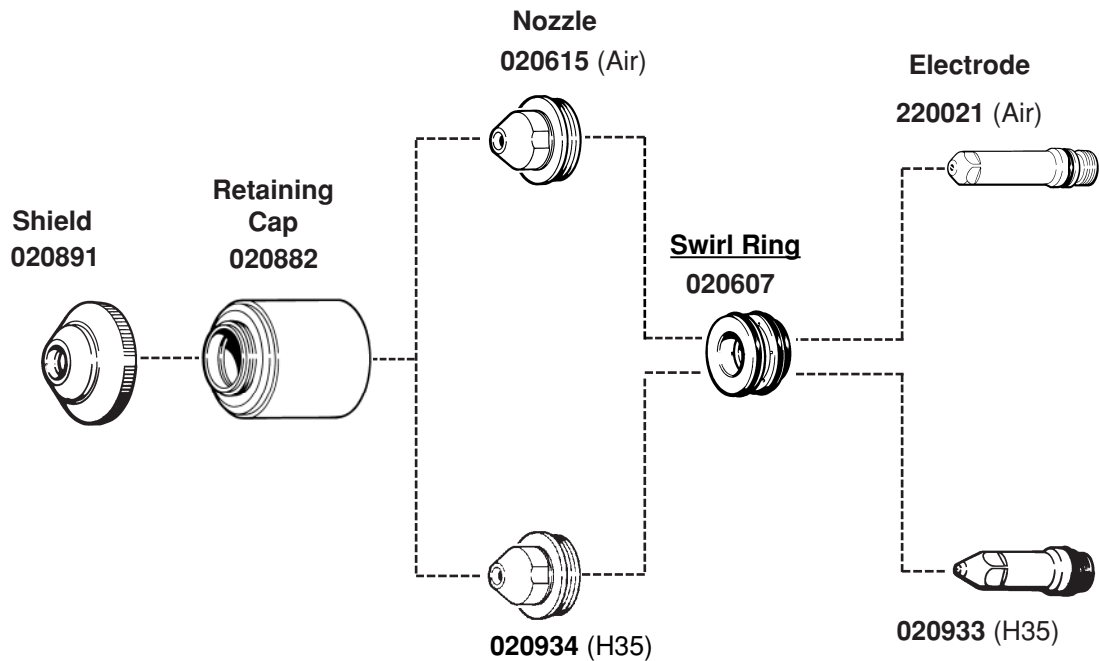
PAC200E (65°) Gouging Trigger Torch Consumable Parts
